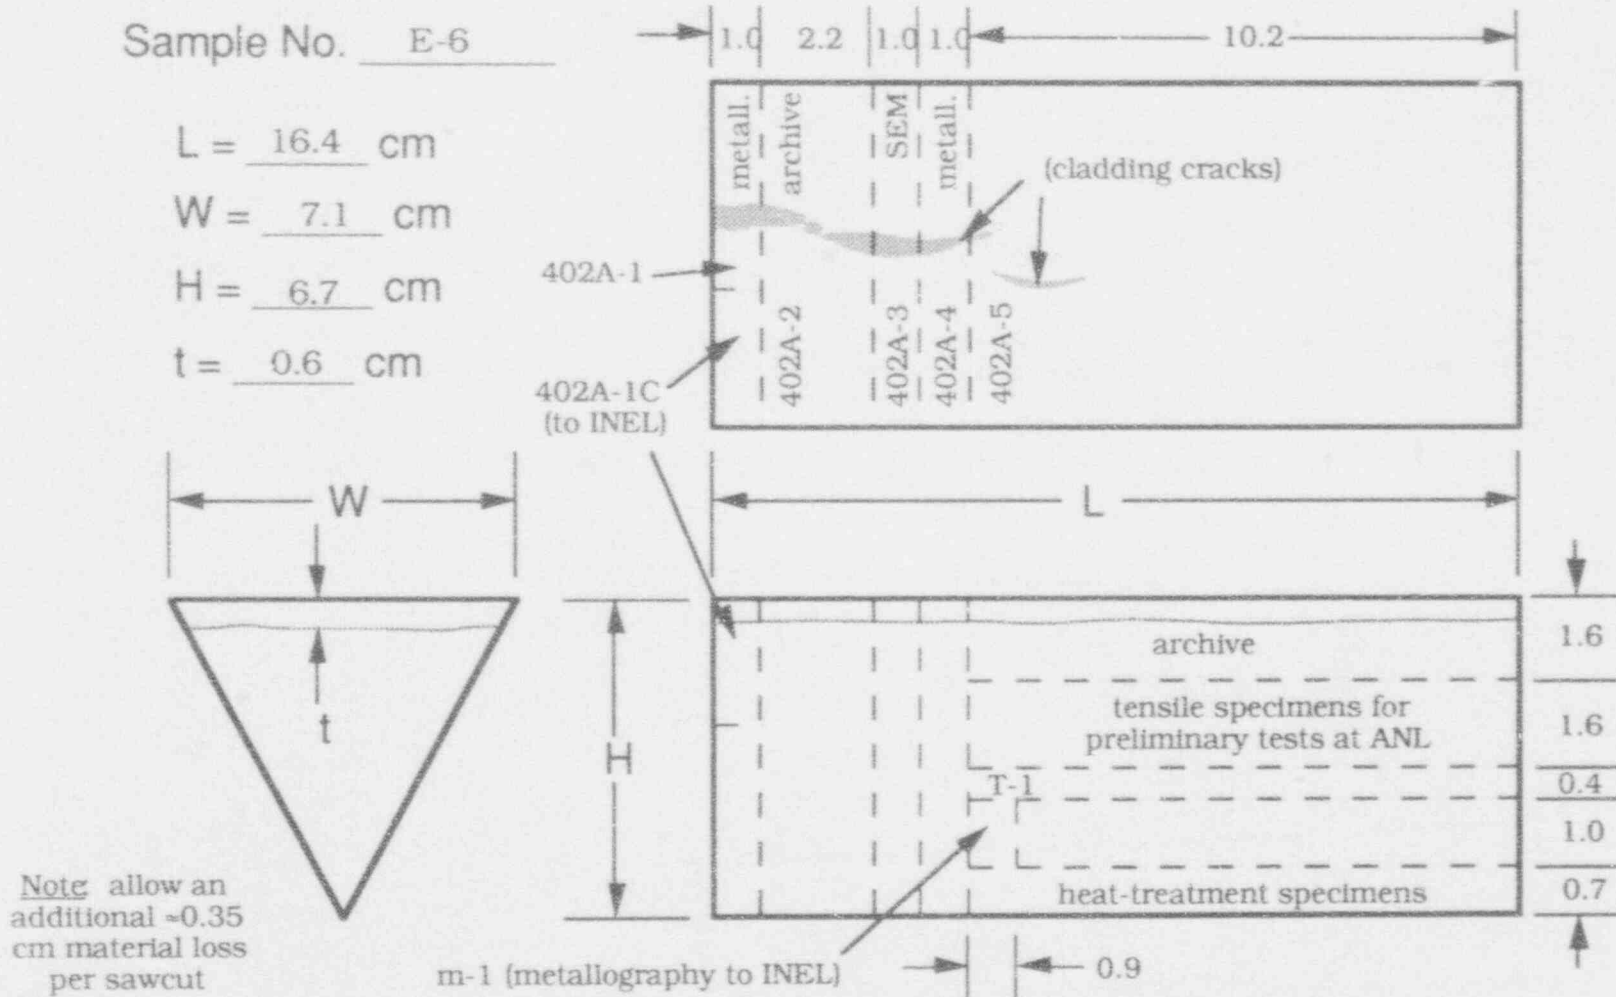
Dimensions and initial sections from TMI-2 lower head Sample E-8.
